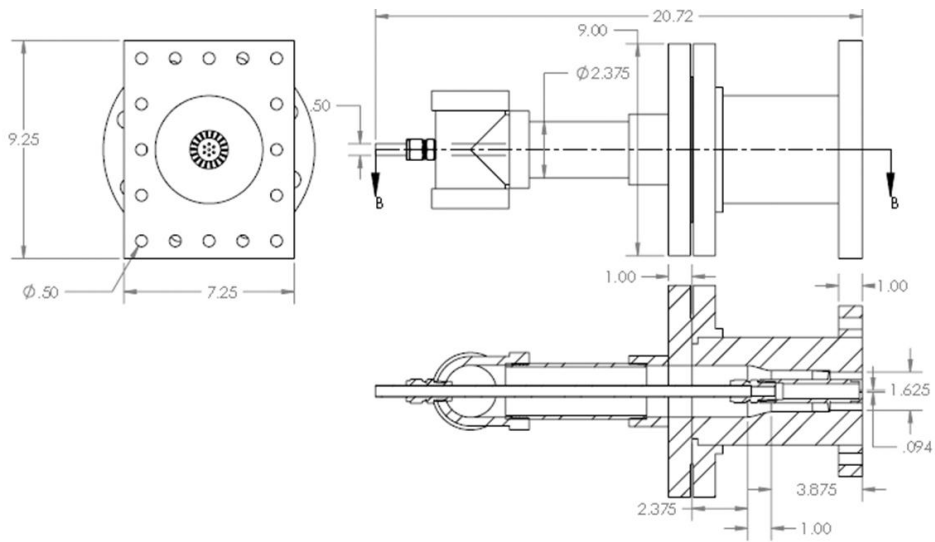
Schematic of the vitiator swirler assembly, dimensions in inches
